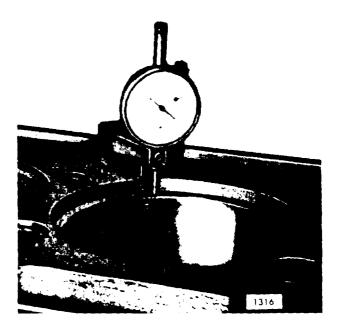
B-18. Checking Cylinder Liner Counterbore with J 22273
